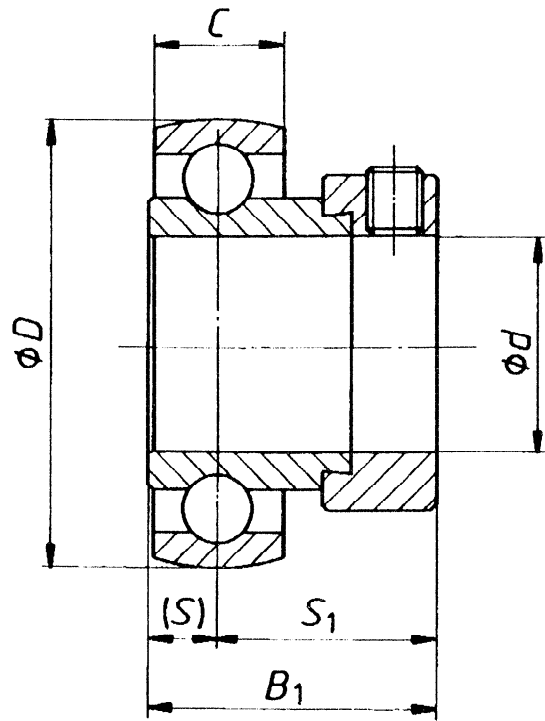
Bearing with eccentric locking collar — Narrow overall width (see table 3)
